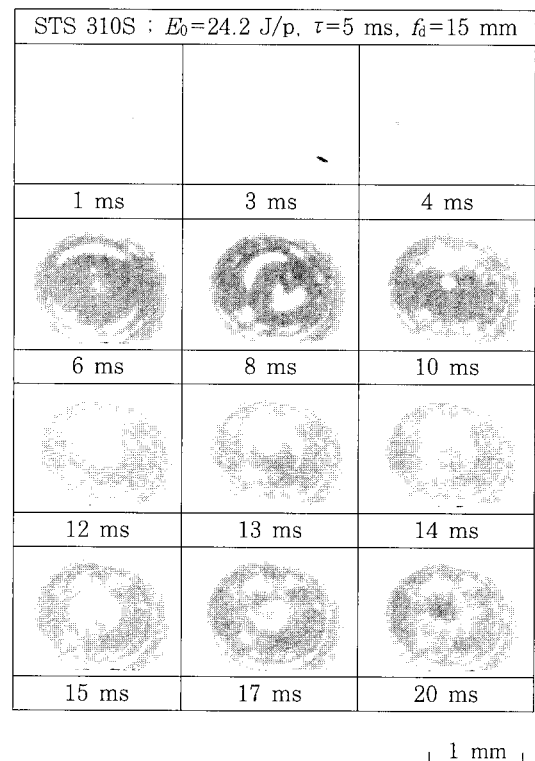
High speed video pictures showing fusion and solidification behavior during pulsed laser welding of STS 310S.
